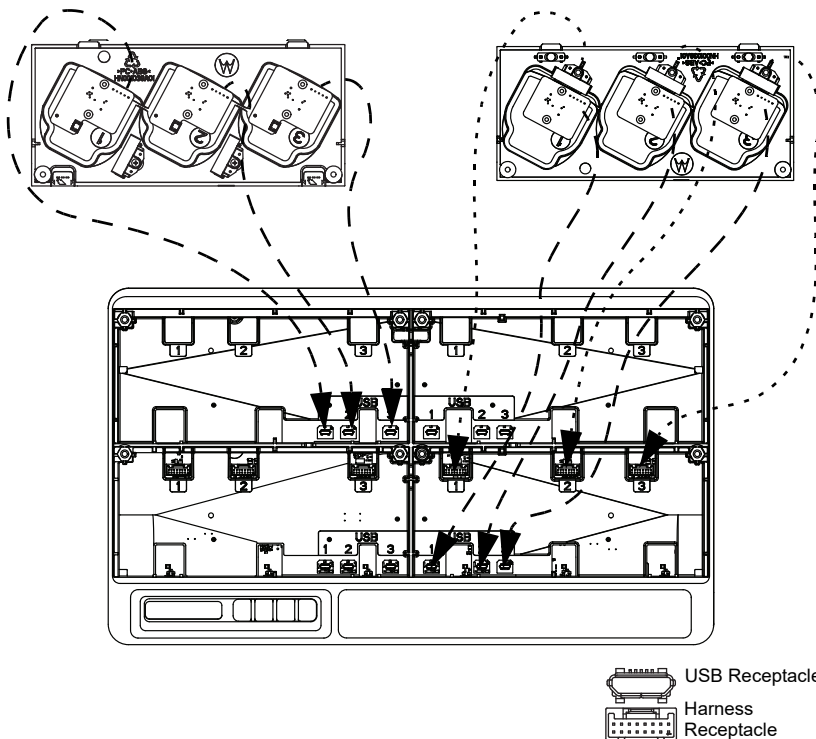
Securing charging pocket to Multi-Unit Charger base.
